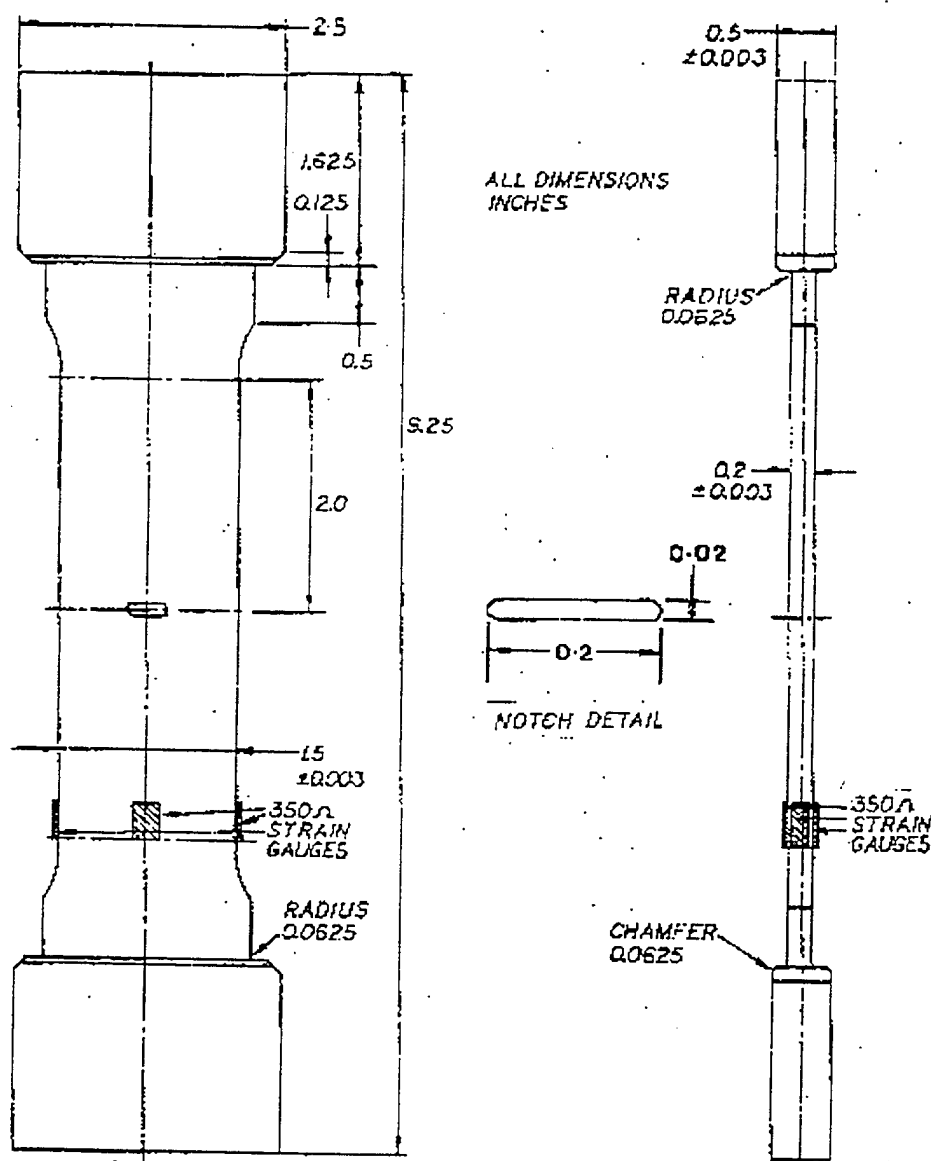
Fixed End Centre Crack 7075-T651 Specimen
